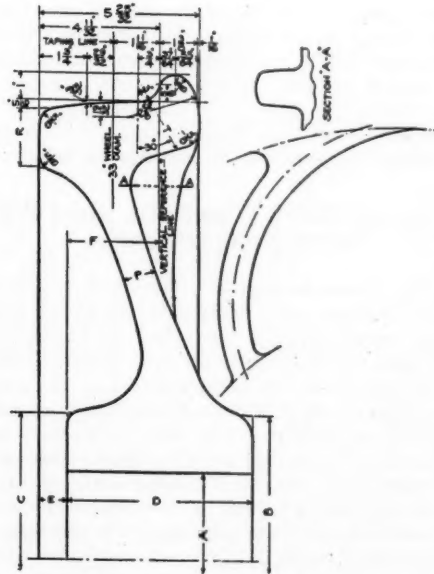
Dimensions of Single Plate Bracketed Wheels
